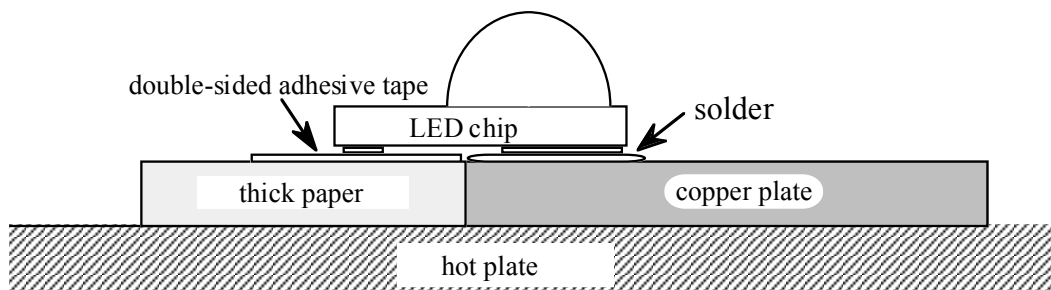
Soldering thermal pads of LED chips on the radiation pad.
